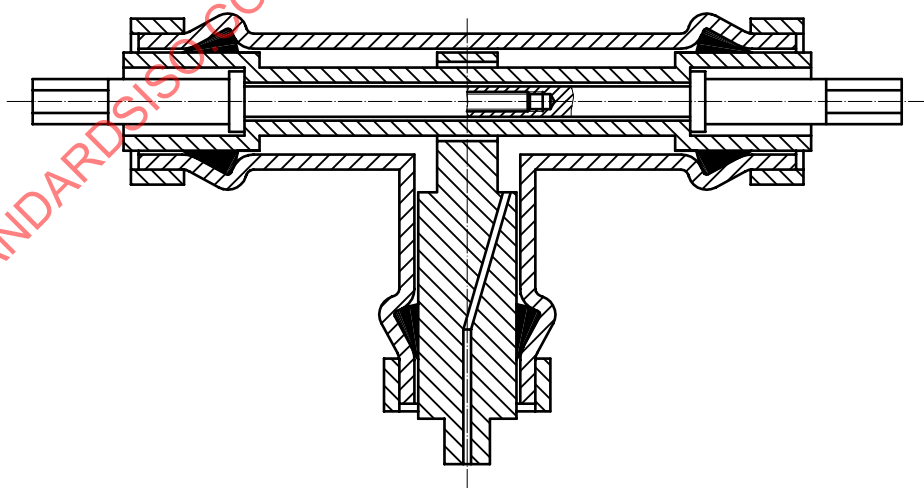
Example of a pressure-tight test piece assembly with internally pinned joints and gasket seals and without hydrostatic end thrust
